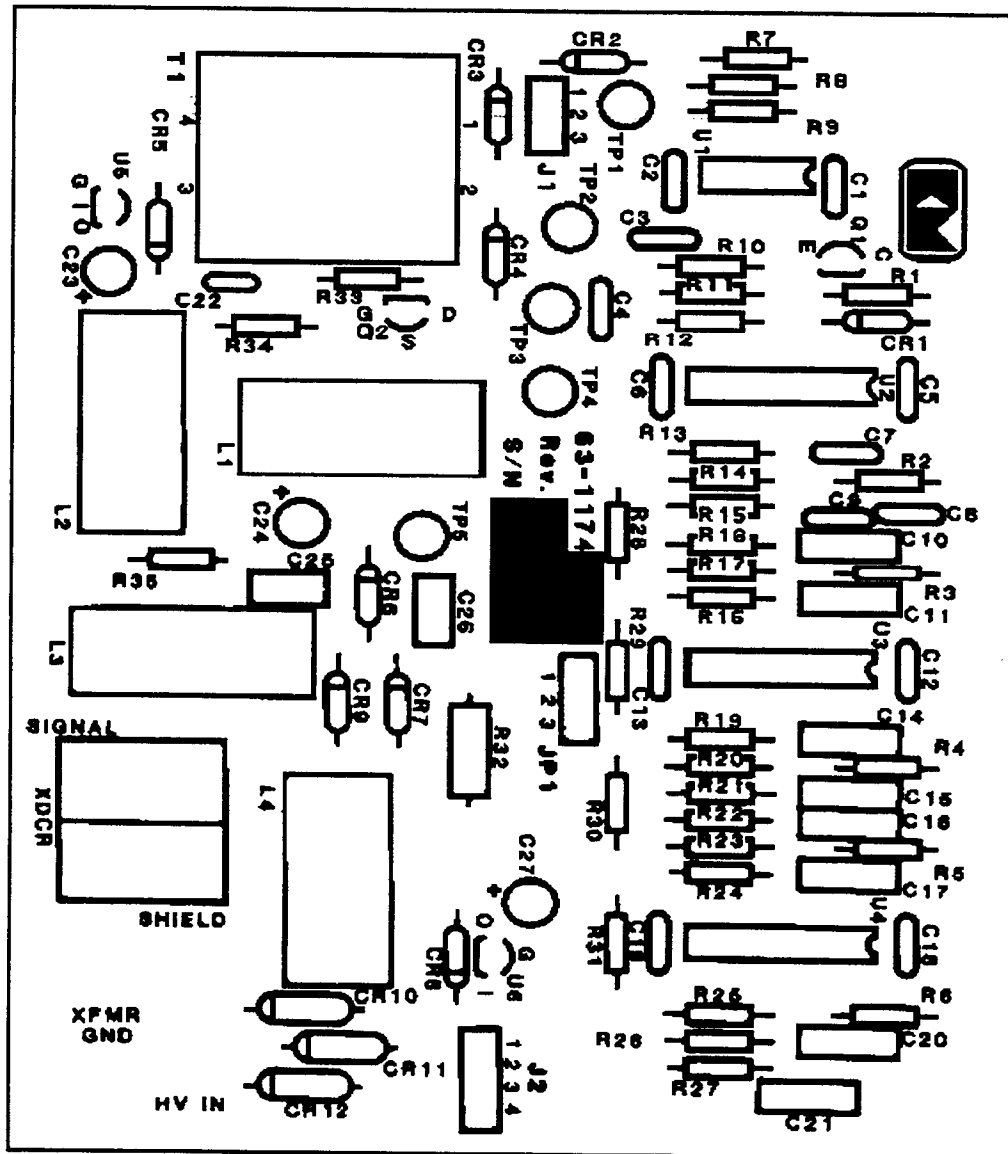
Assembly Drawing of the Filter Module Board (100-foot System), P/N 63-1174.
